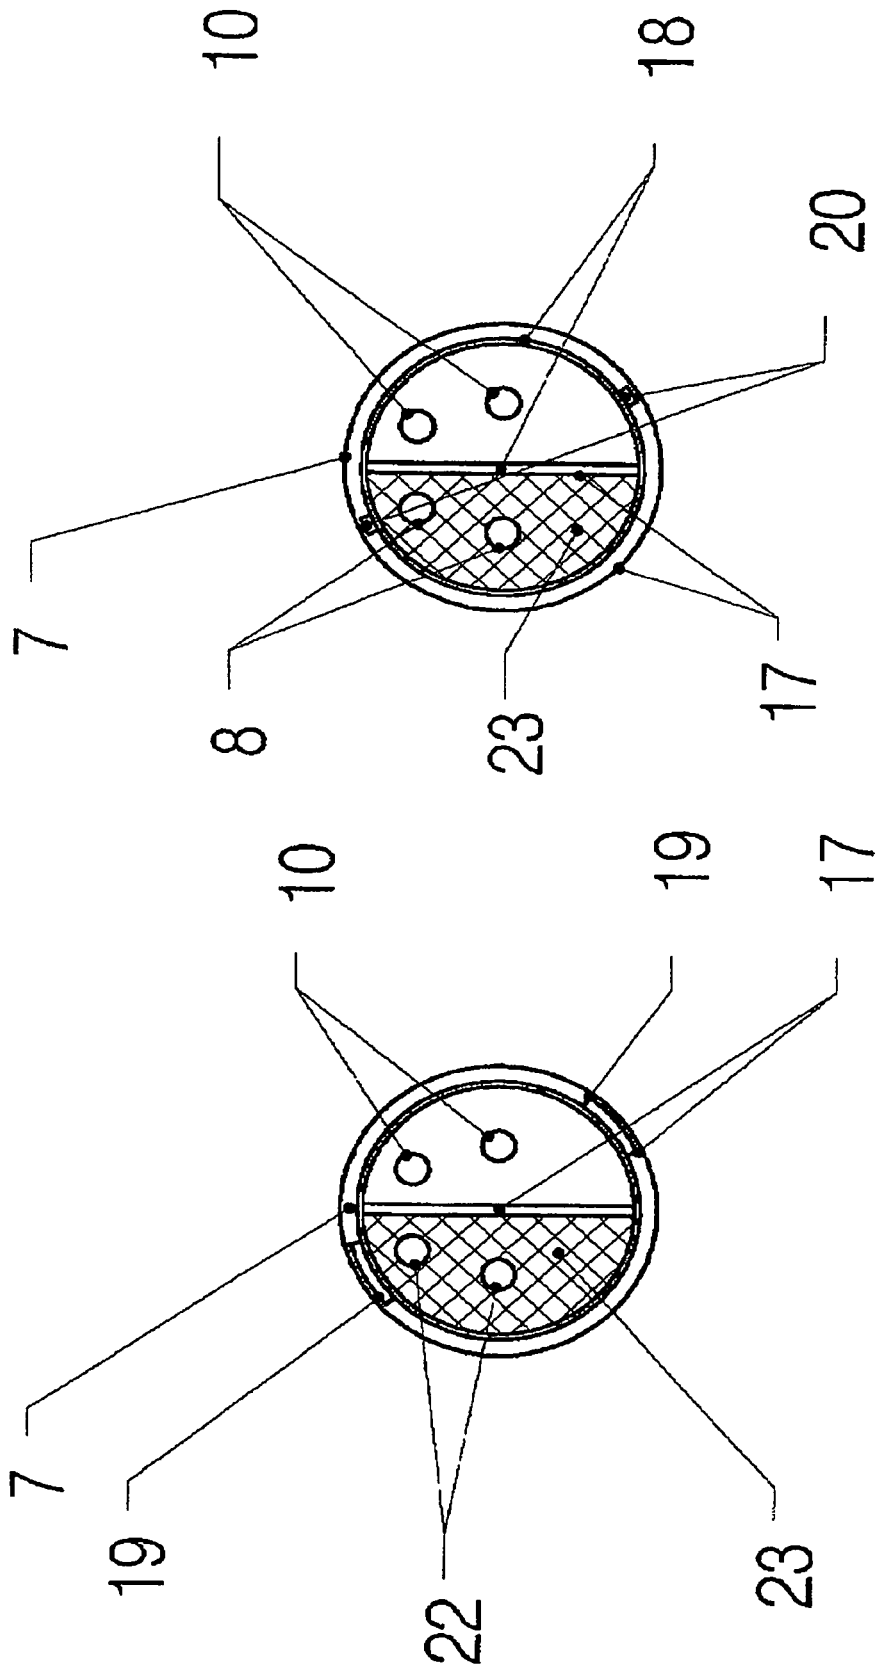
Top View of Ball Valve Assembly Water Chamber Splitter
